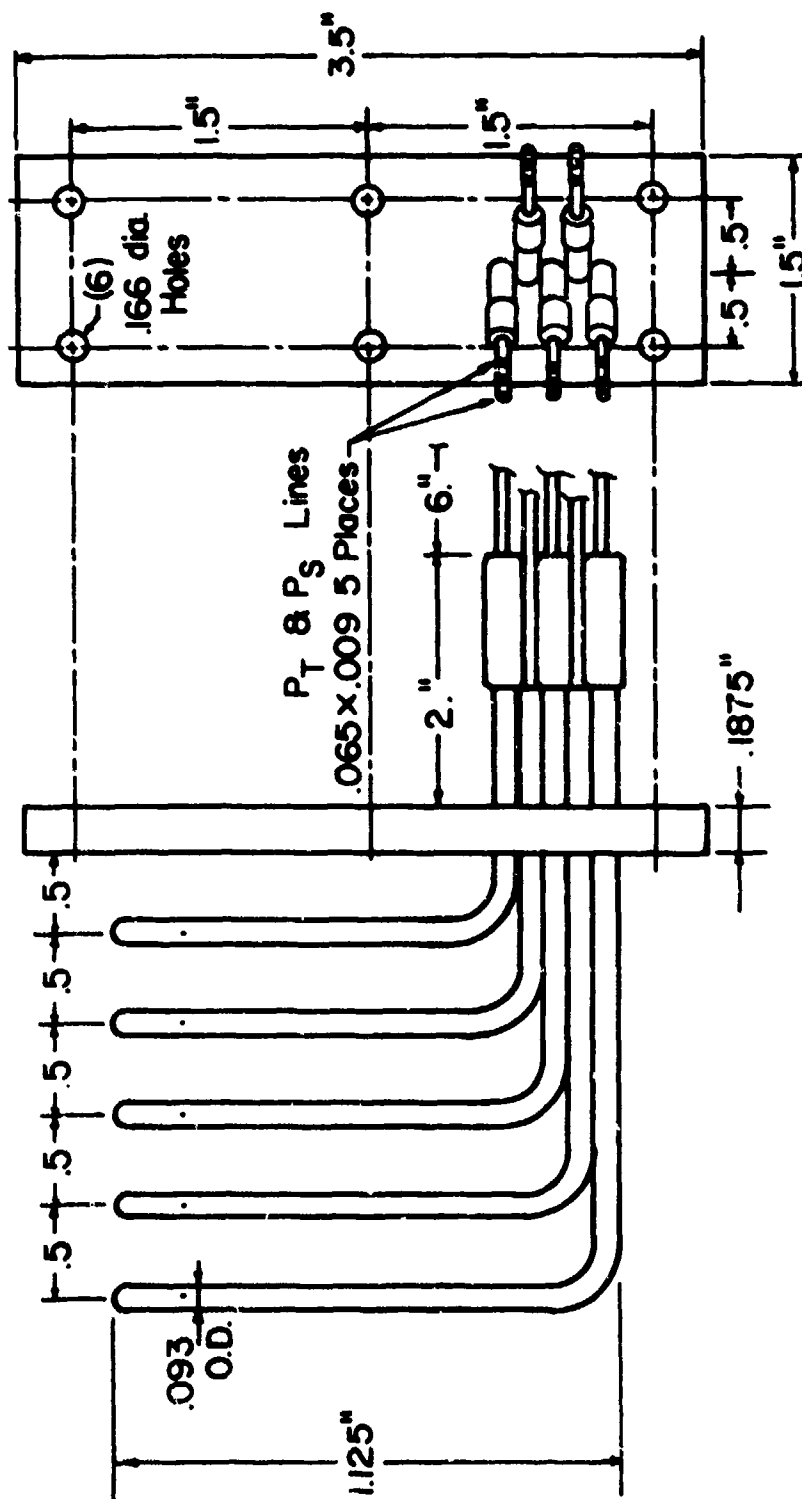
(a) Design of Pitot Tube Rake (Larger Size)
